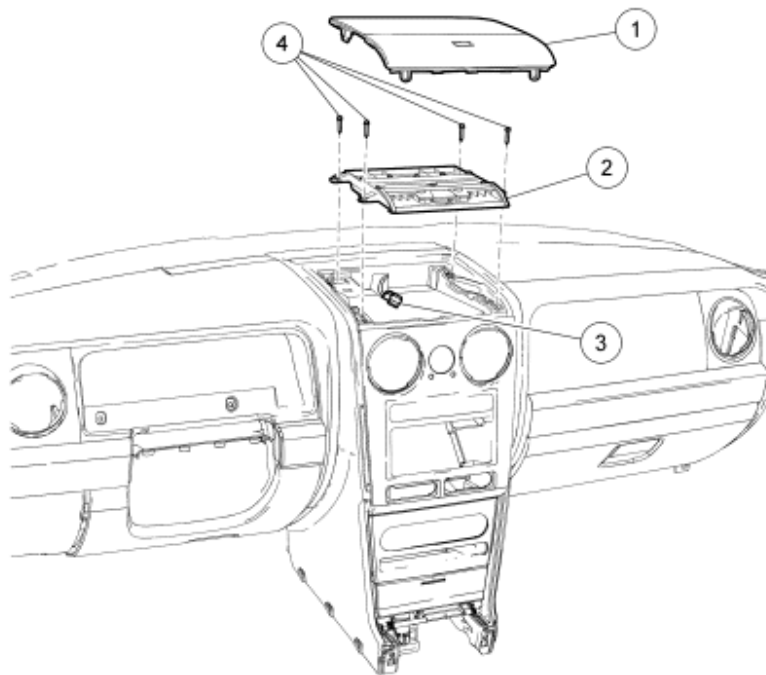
Exploded View Of Global Positioning System (GPS) Antenna
